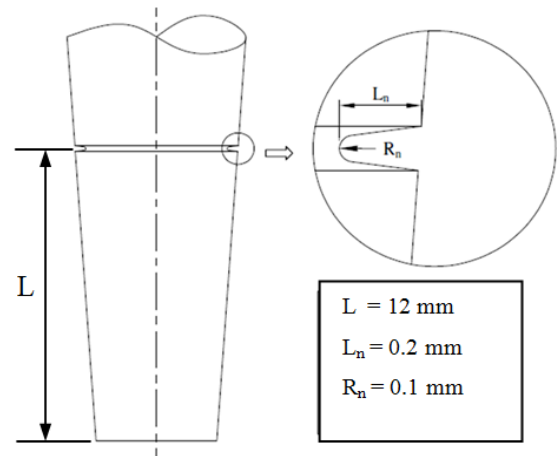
A schematic drawing of the shape and size of the tapered pin.
